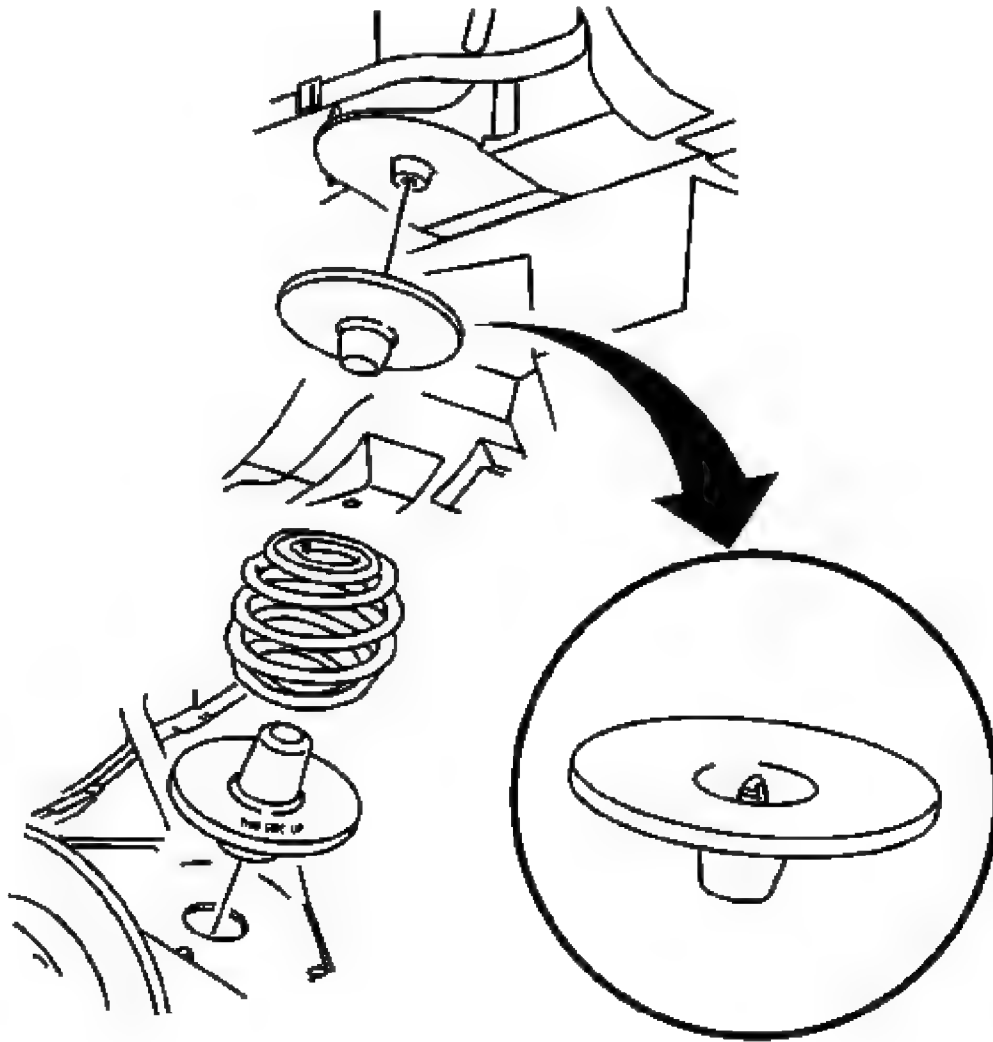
Removing Lower Control Arm Upper Insulator & Spring
